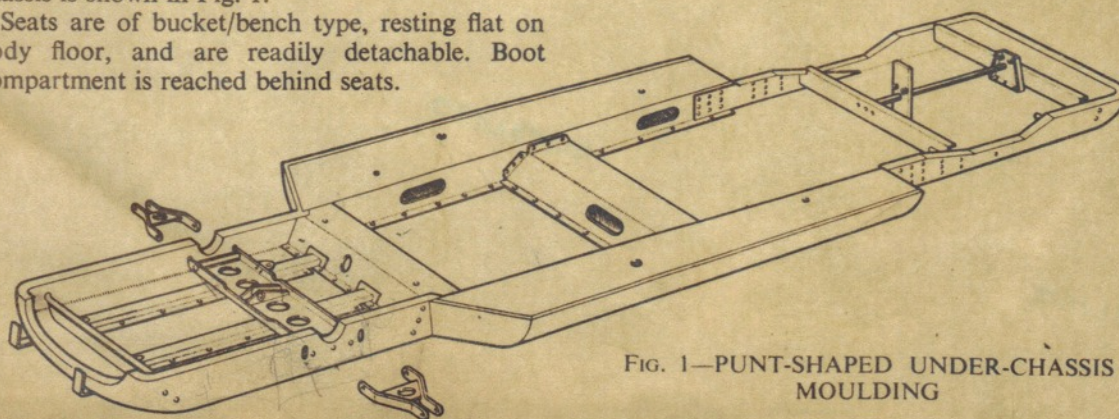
PUNT-SHAPED UNDER-CHASSIS MOULDING
